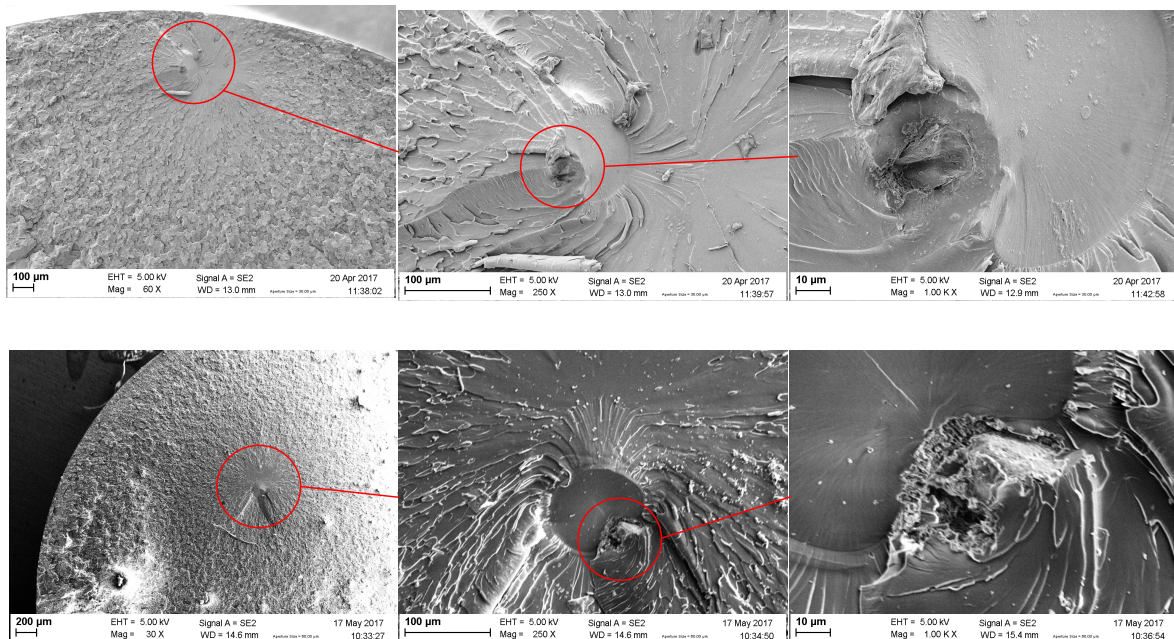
Fracture surfaces of the specimens broken under quasi static loading after cycling loading at 40 % of the stress at failure with zooms on the initiation of the fracture. On top: sample 7 fatigue. On the bottom: sample 8 fatigue.
